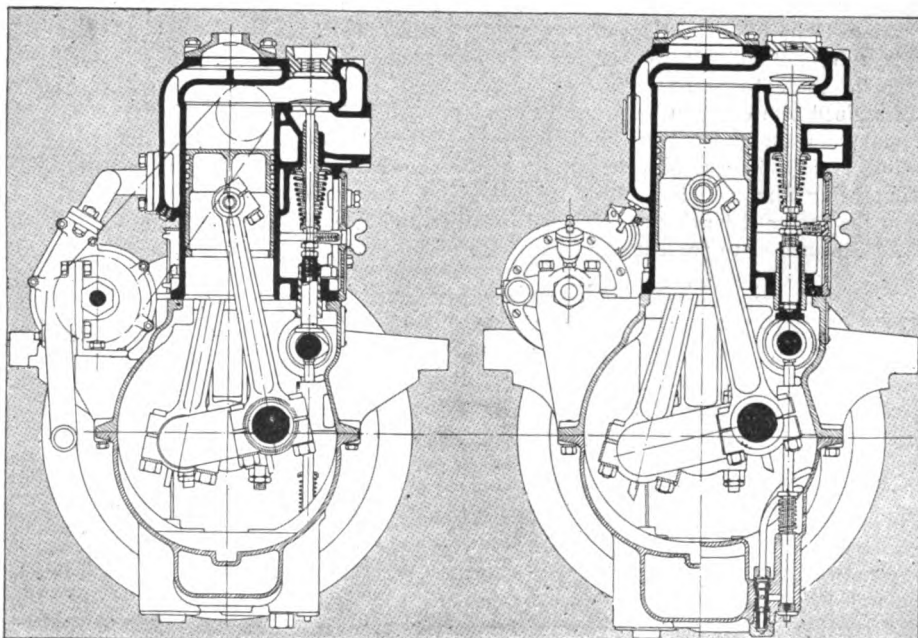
Transverse section through Abbott 34-40, left, and 44-50, right
